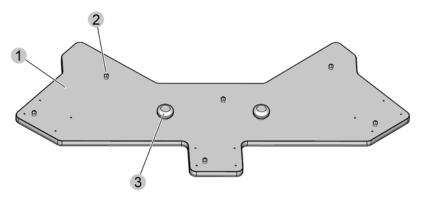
Contact plate for up to 3 pellet stations at positions 4-6 (dosing units 1-3)
